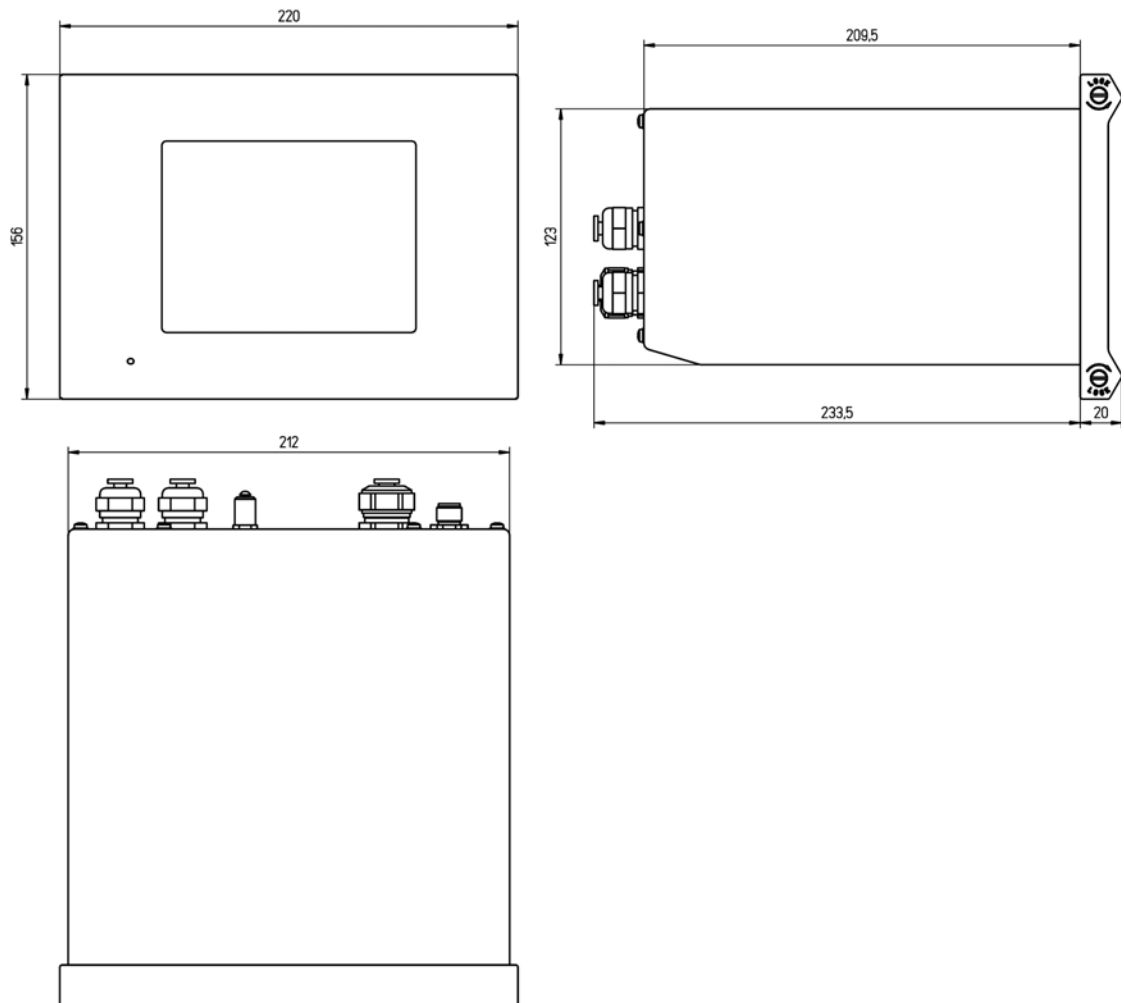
Panel Mount Instrument Dimensions (in millimeters)
